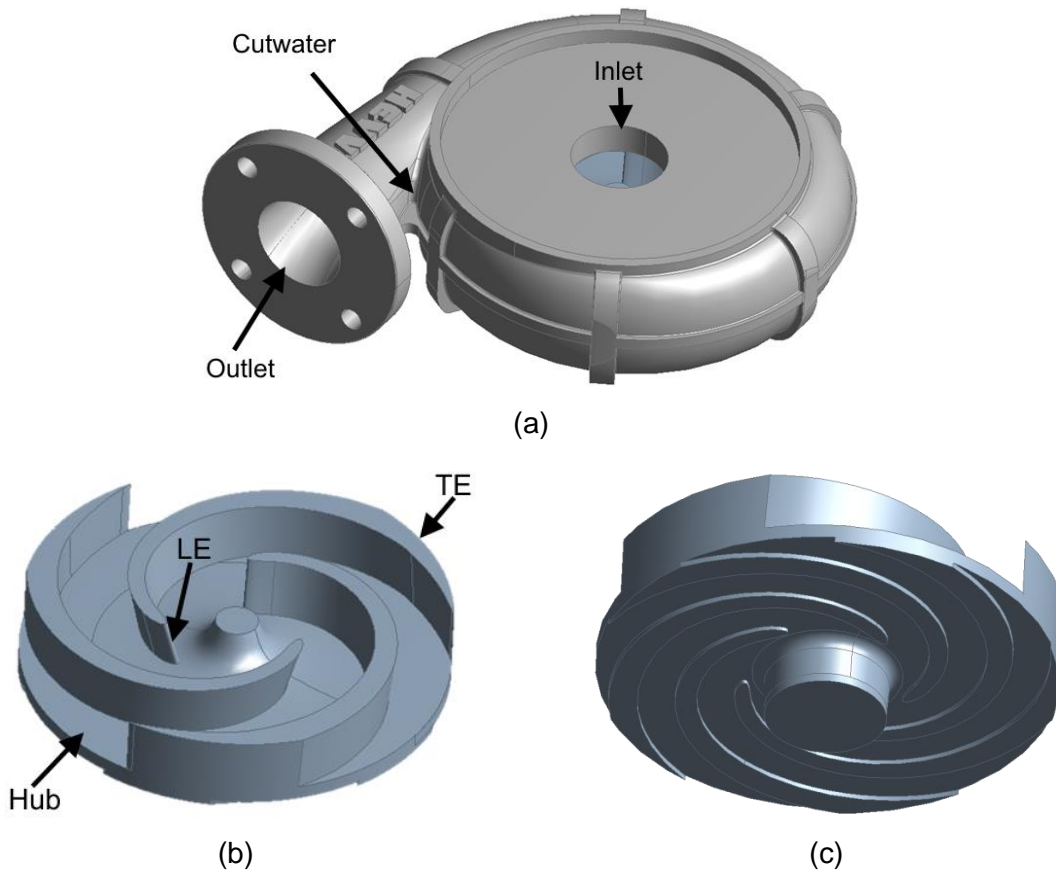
Toyo pump geometry: (a) Volute with impeller inside; (b) Impeller view from above; (c) Impeller view from below
